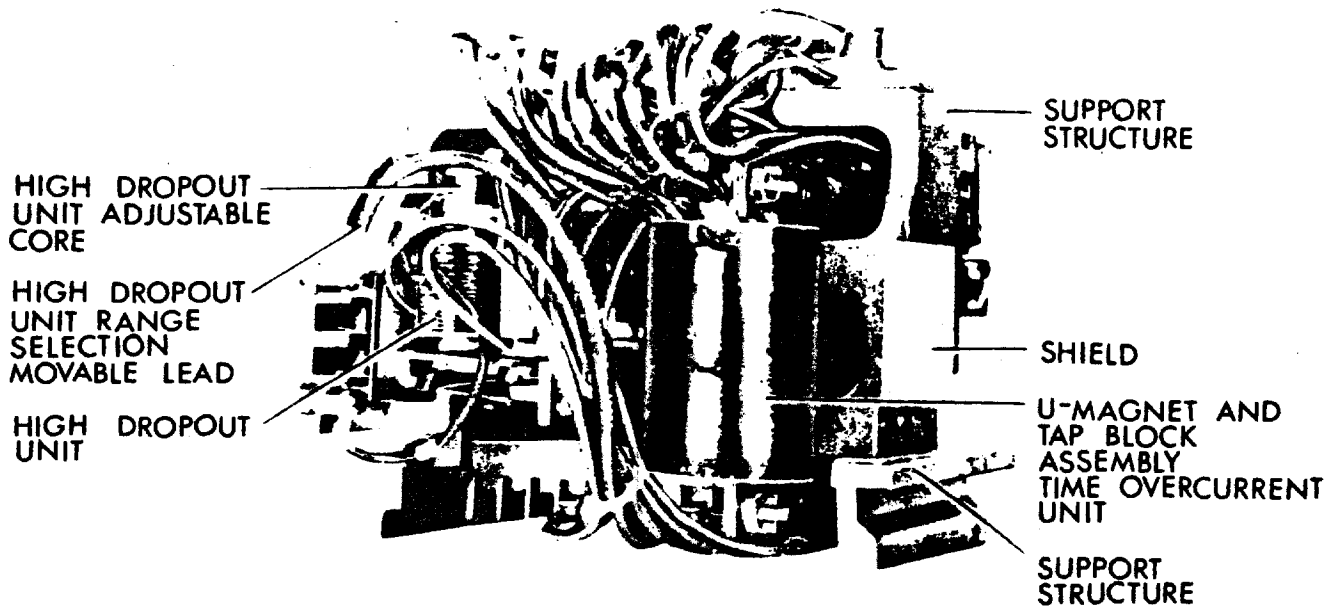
(8043011) TYPE IFC66K RELAY, REMOVED FROM CASE, REAR VIEW
